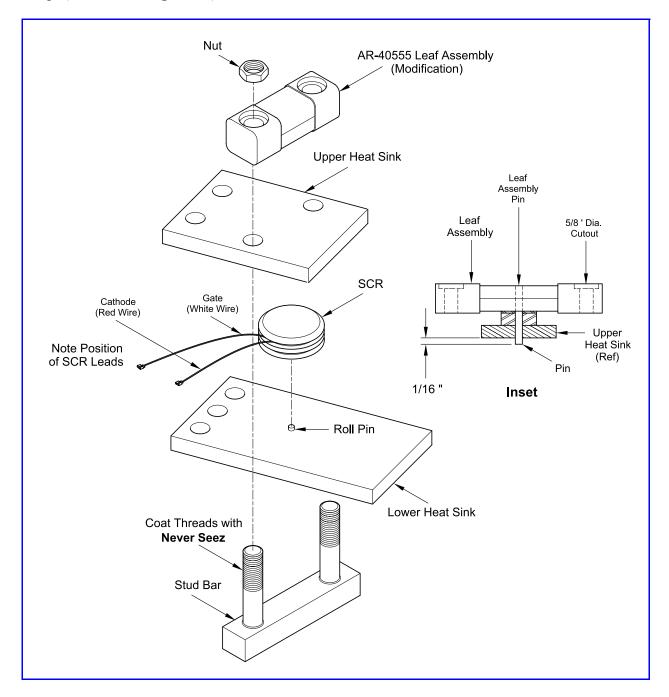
Typical Thyristor Assembly (Showing Modified Leaf Assembly)
